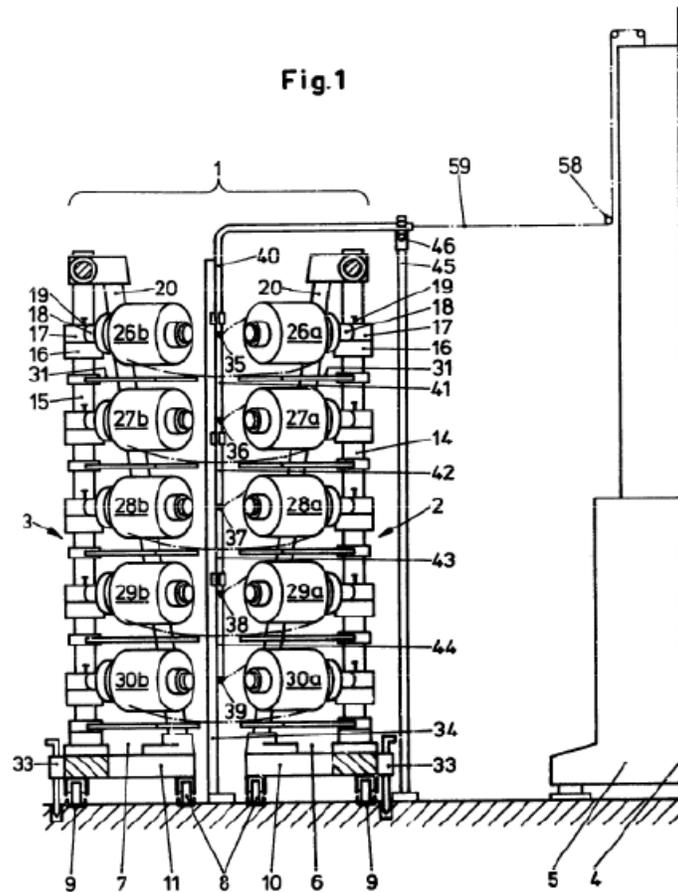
depicts a creel arrangement comprising arbors 18 for holding bobbins, creel carriage 6 with active bobbins 26a–30a, and creel carriage 7 with reserve bobbins 26b–30b. *Id.* ¶¶ 13–14. The arrangement also includes thread guide support 34 with a “thread guide for each pair of co-operating bobbins” (e.g., thread guide 35 for bobbins 26a and 26b). *Id.* ¶ 15. In the embodiment shown in Figure 1, the thread guides are “inlet openings” of thread guide tubes 40–44, which guide the thread coming from the bobbins. *Id.* Barmag also discloses that “thread guide eyelets” can be used instead of thread guide tubes, and in that scenario, thread guide eyelets would be positioned in the “deflection points of the thread path and on the cross
